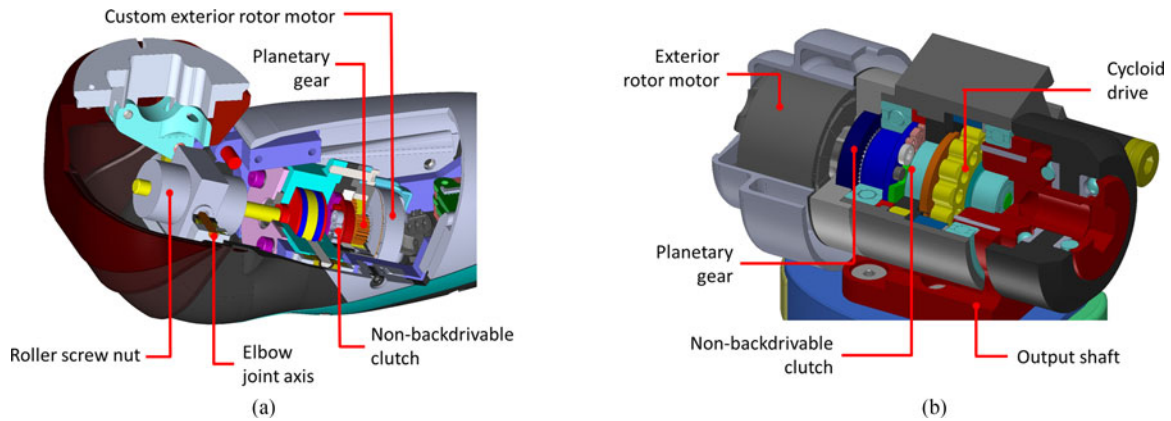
(a) Partially sectioned view of the elbow module including a custom exterior-rotor motor, a planetary gear, a custom nonbackdrivable clutch, and a roller–screw acting as a slider in a four-bar linkage configuration. (b) Partially sectioned view of the RIC arm wrist, including a custom exterior rotor motor; a planetary gear transmission; a custom nonbackdrivable clutch; and a custom cycloid transmission.
